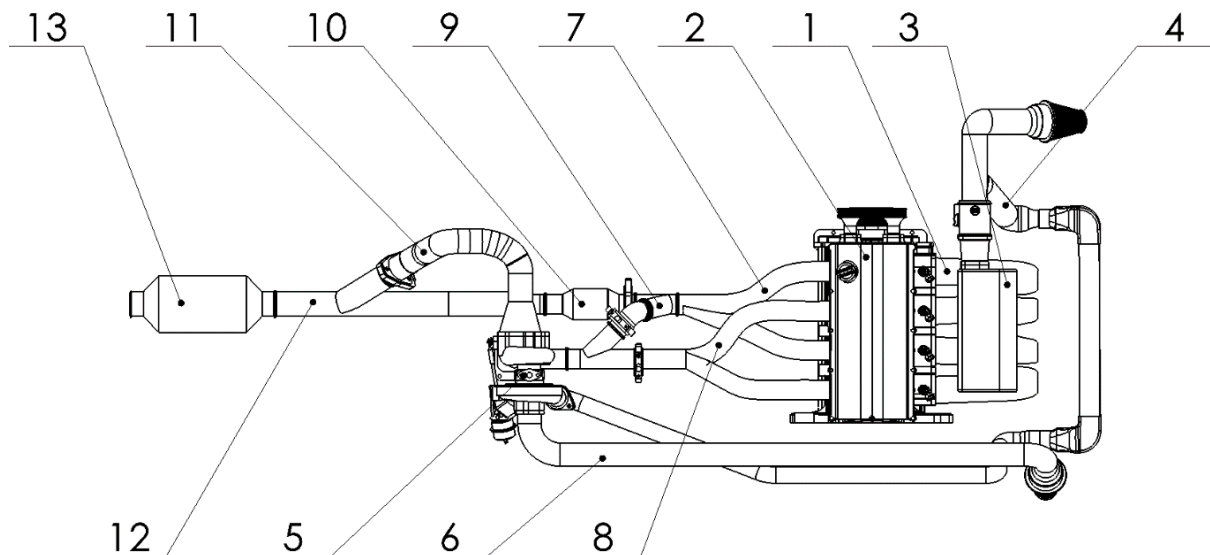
Exhaust manifold/system connected to four-cylinder internal combustion engine diagram.
